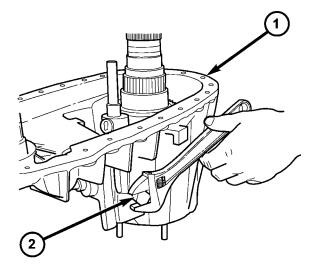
Remove Shift Motor Assembly From Transfer Case
